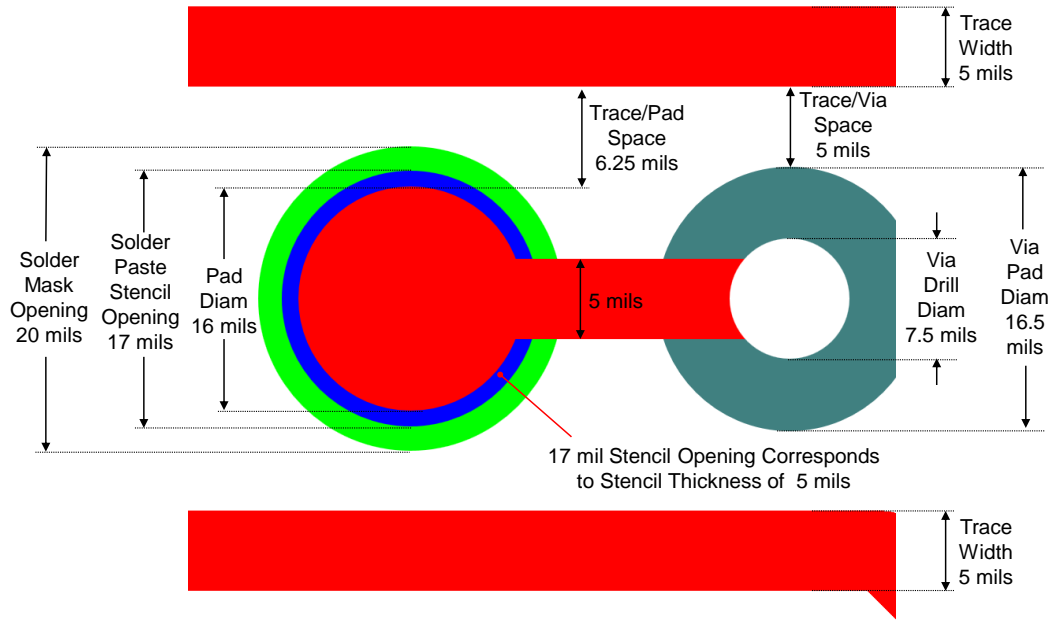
PRP Package Footprint Example 1 – 5-mil Trace and 7.5-mil Via Drill Hole
